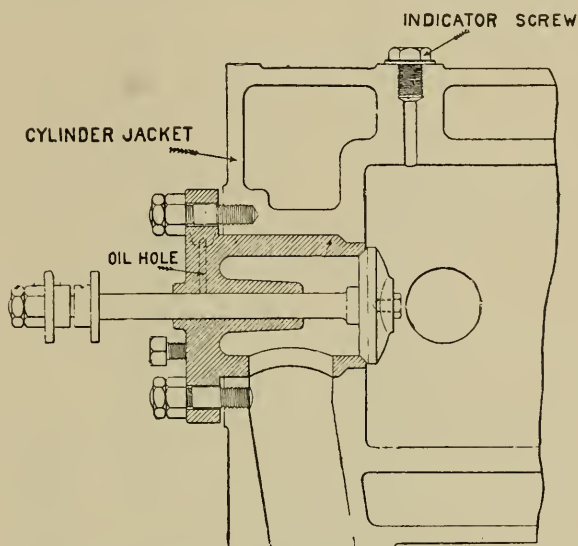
Enlarged view of Exhaust valve of Engine shown in Figs. 63 and 64.
